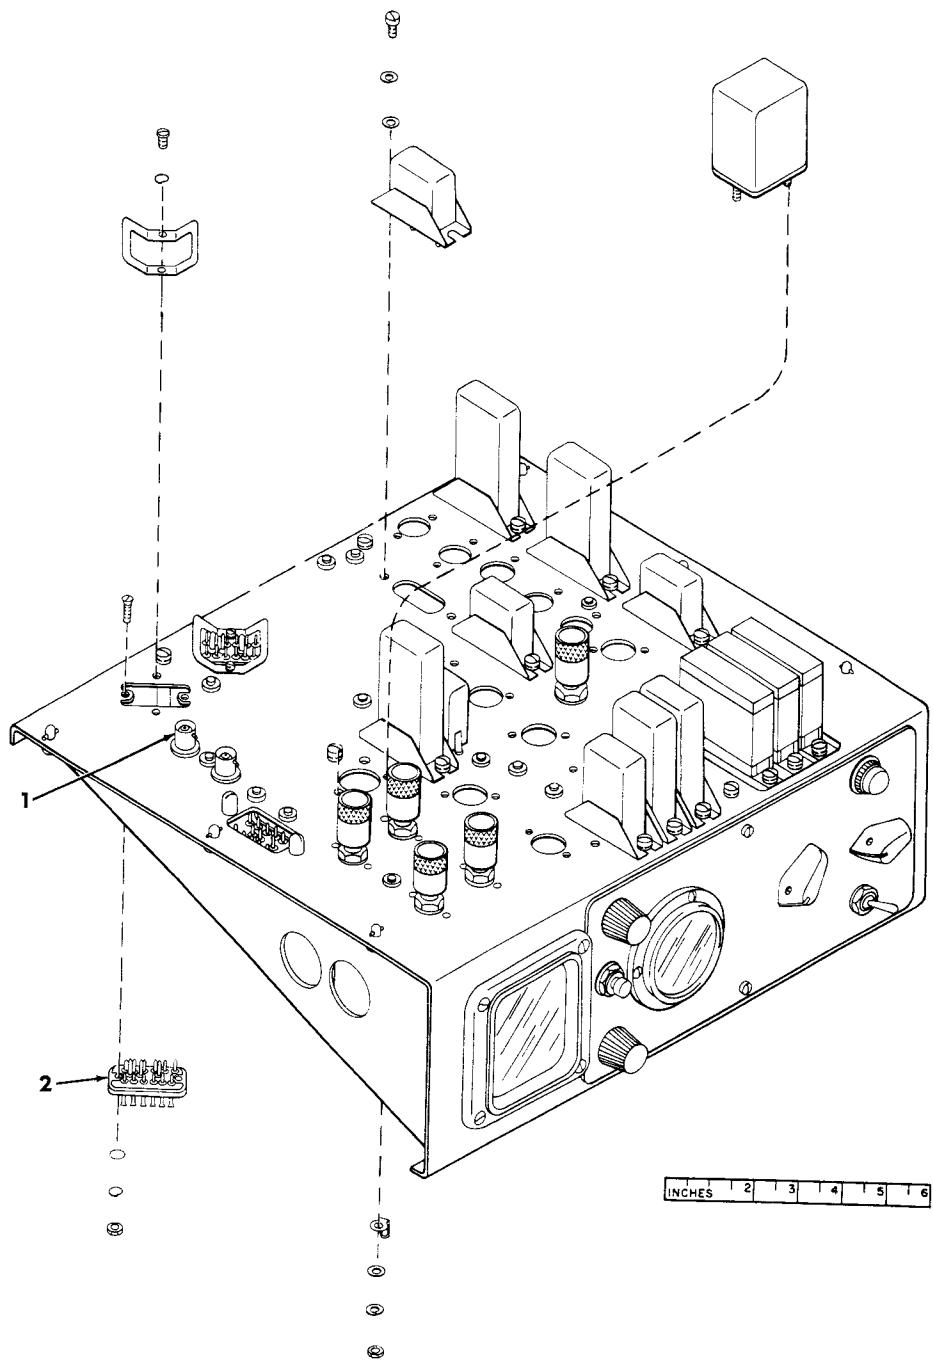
Generator, pulse 0-301/M (8007721) – partial exploded view
